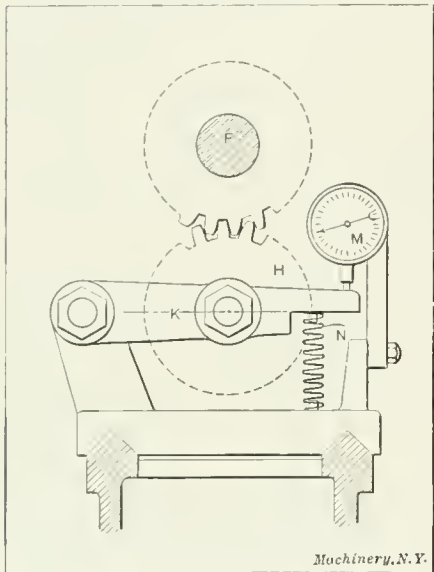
A Testing Rig used for Comparing the Gears cut in the Hobbing Experiments
